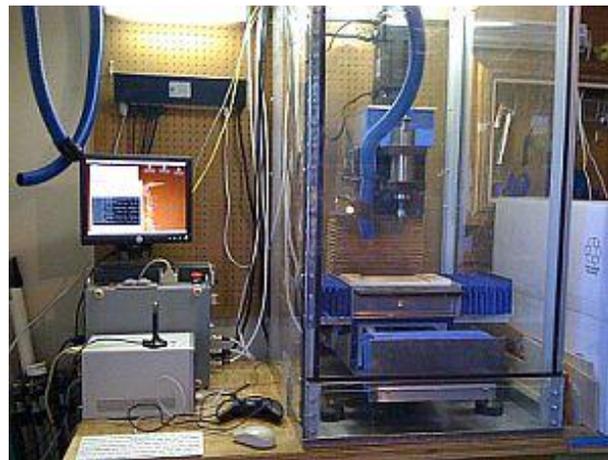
Our home-made milling machine, controller and enclosure constructed from parts found on Internet auction sites, surplus vendors and parts that we fabricated. Most components of the NOVA were wholly or partially created via this CNC mill.
